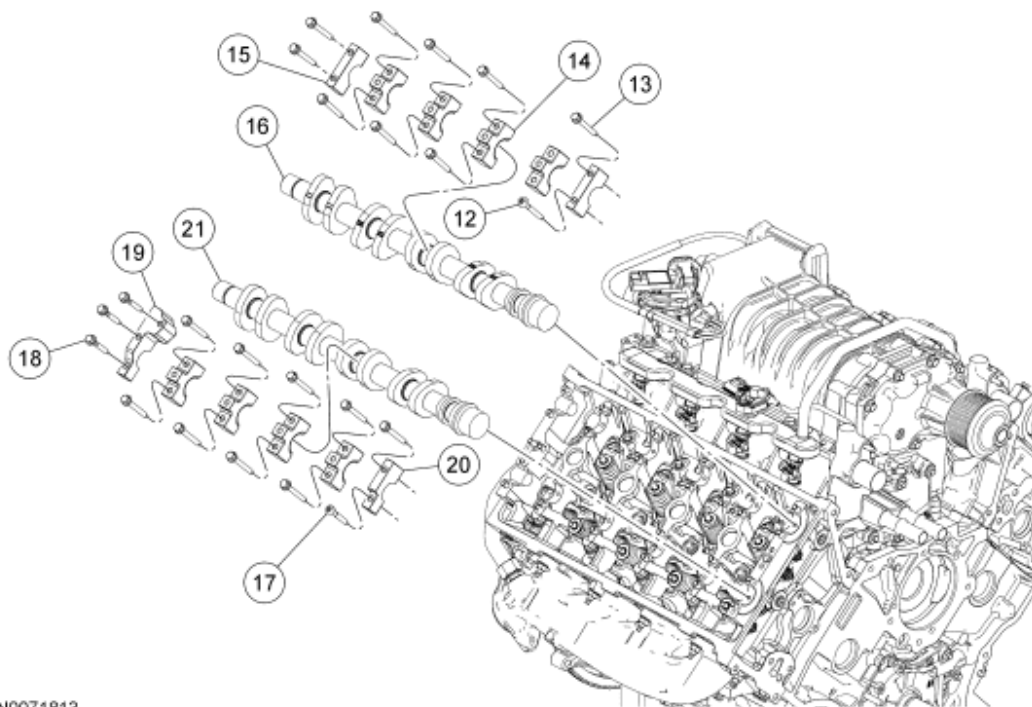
Exploded View Of RH Camshaft (2 Of 2)
